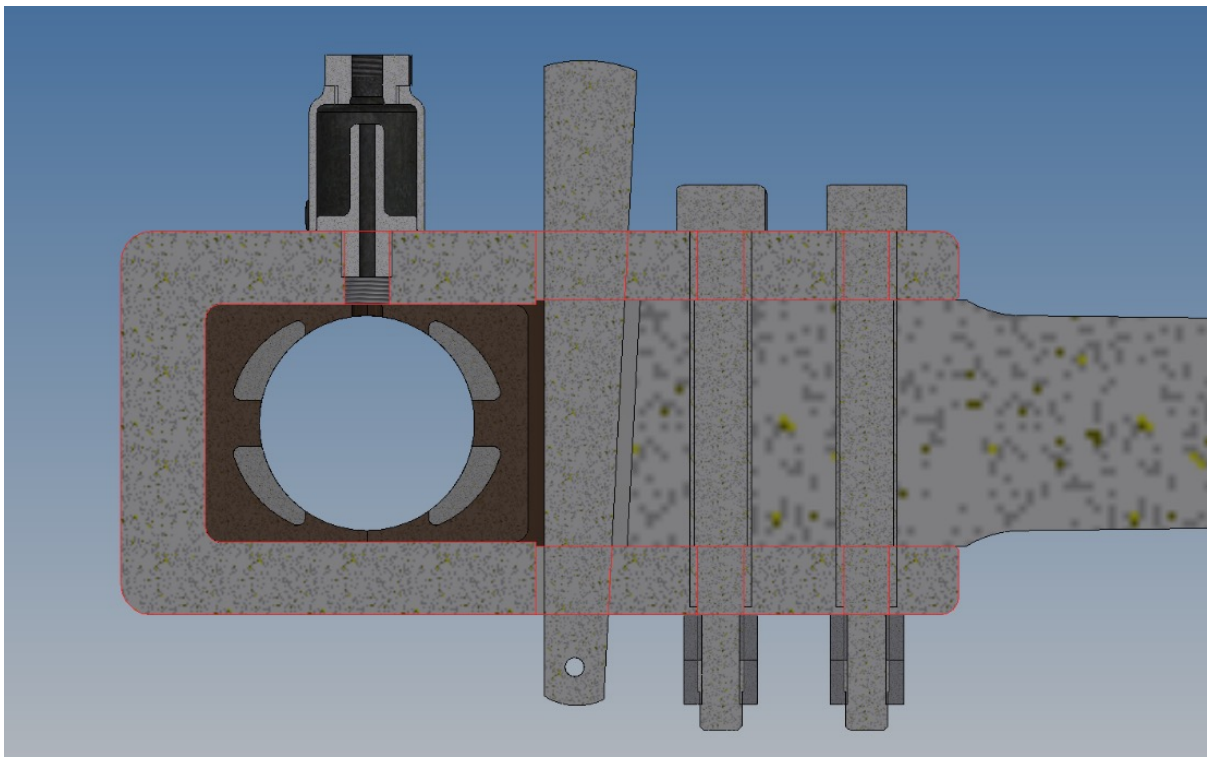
STEAM ENGINEER BEARING LOCATION
